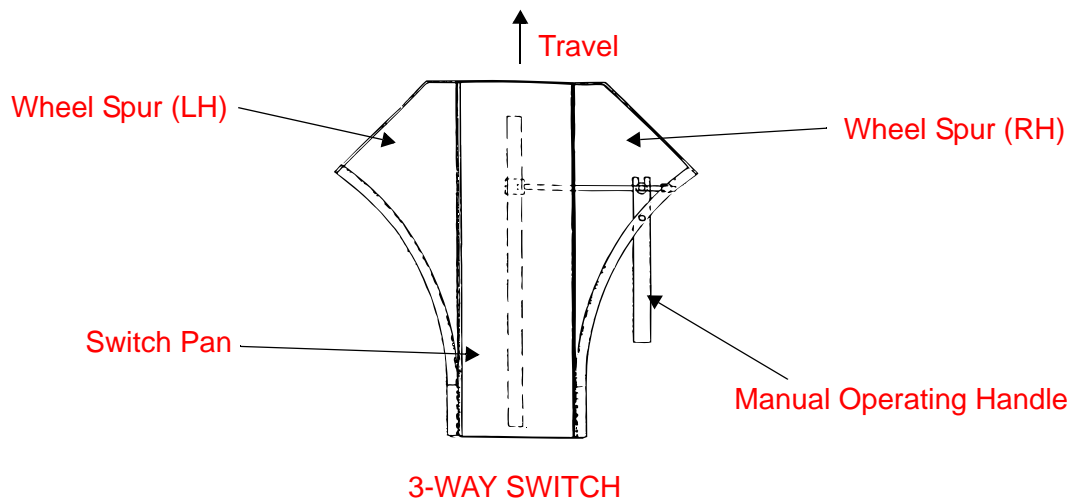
Light Duty Wheel Conveyor - Swivel Wheel Switches
